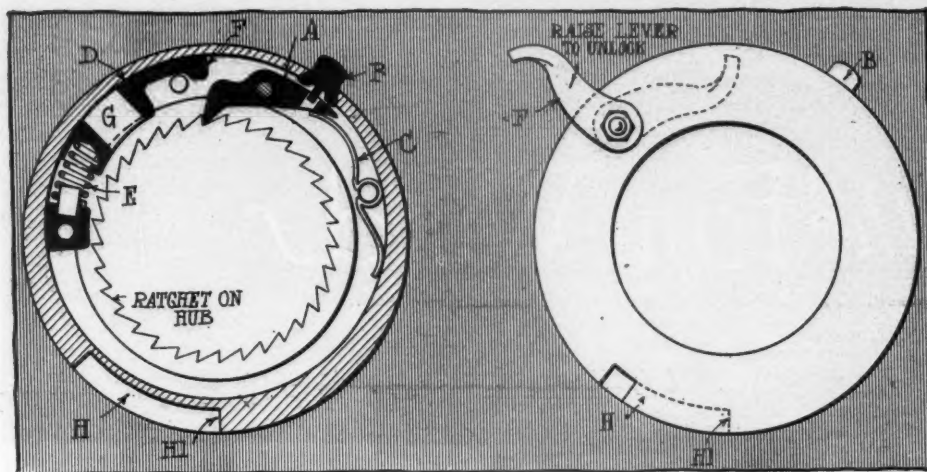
LOCKING DEVICE ON THE SANKEY DEMOUNTABLE WHEEL
